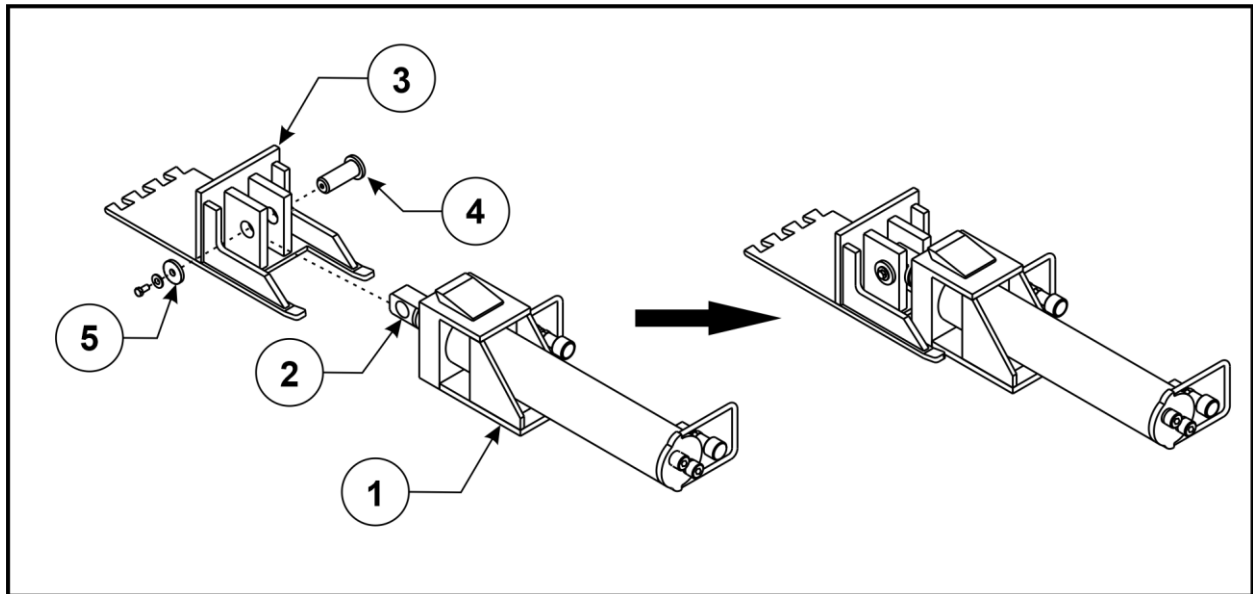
Cylinder Assembly Connection to Push-Pull Head
